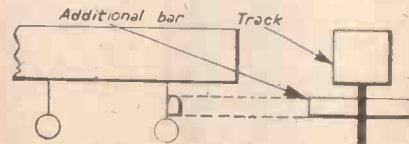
Side and elevations, showing the additional bar fitted to the leading track runner.
